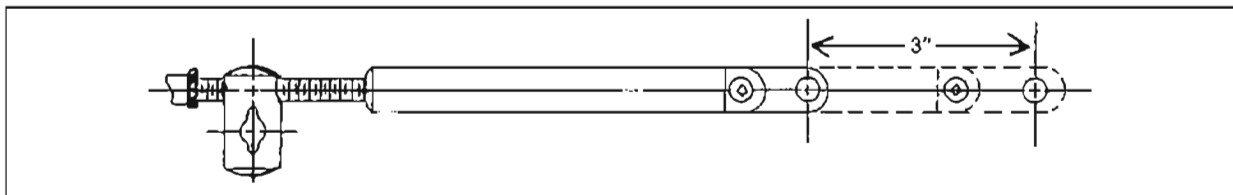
MINIMUM Shift Control Cable Travel (3 inches)
